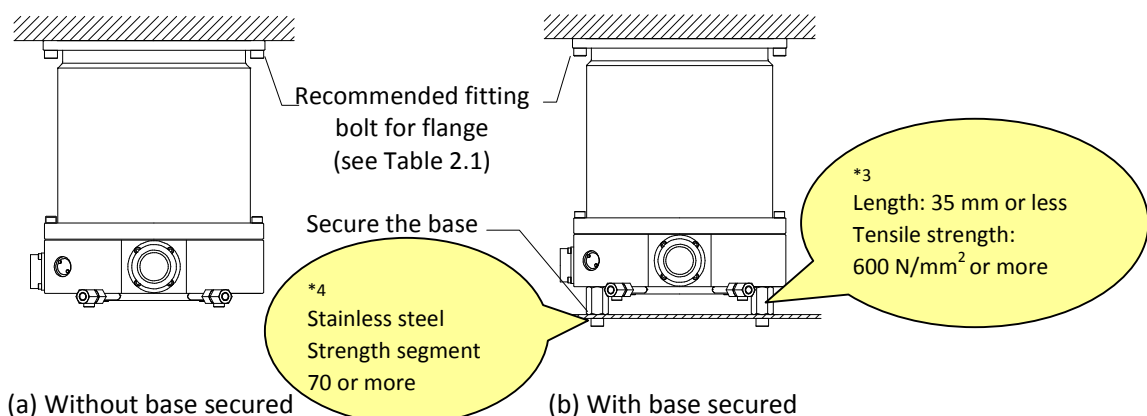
Methods of securing the STP pump using inlet flange holes
